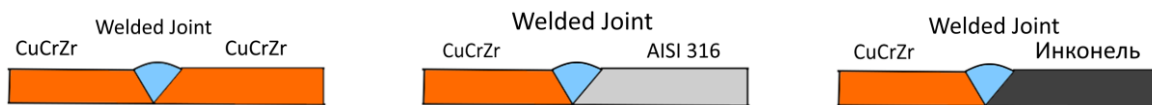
Schematic Diagram of Welding Configurations for Material Pairs
